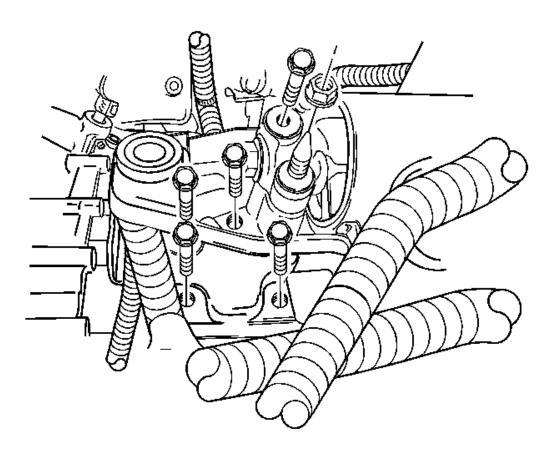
View Of Range Selector Cable & Cable Bracket Retainer Courtesy of GENERAL MOTORS CORP.
